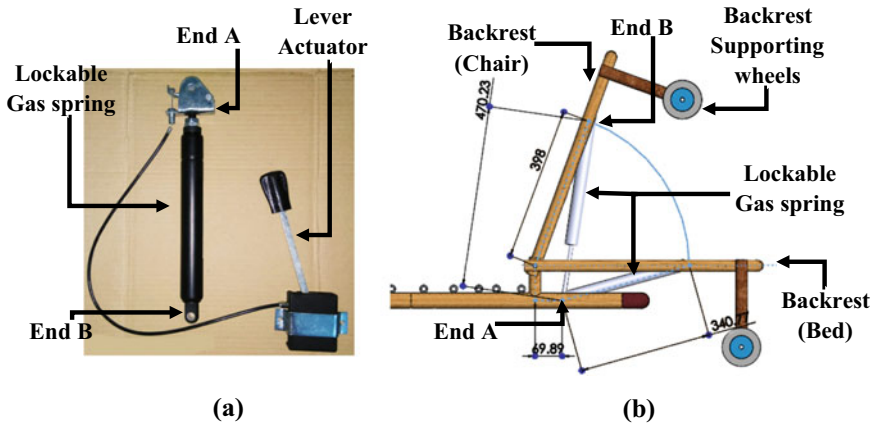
a Lockable gas spring. b Backrest side view CAD model
